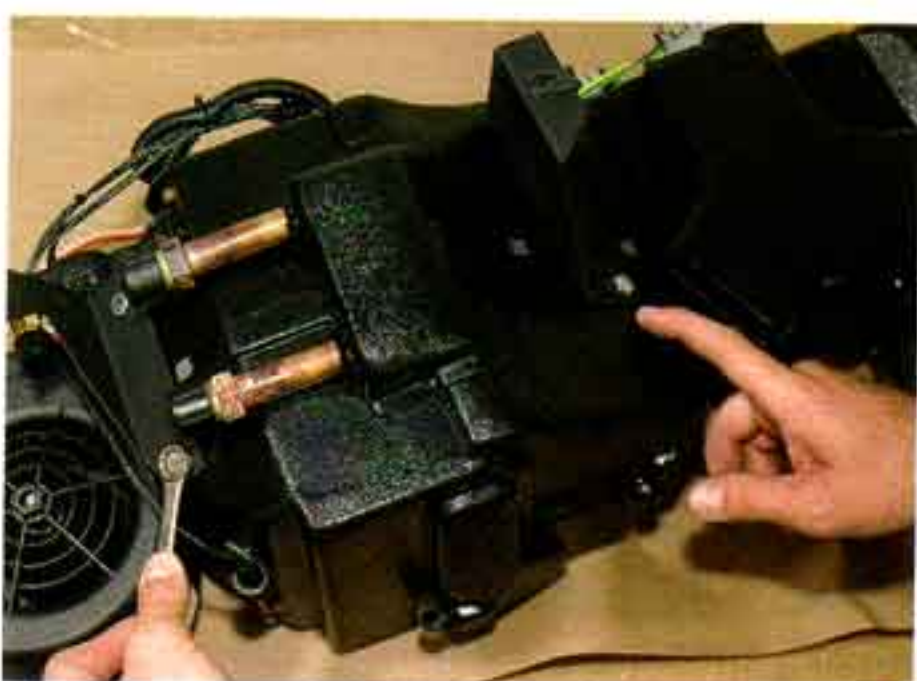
Attach the two evaporator rear support brackets to the evaporator with the 1/4 x 20 x 1/2" hex head bolts provided. These brackets will secure the evaporator to the firewall once the unit is in the car.
